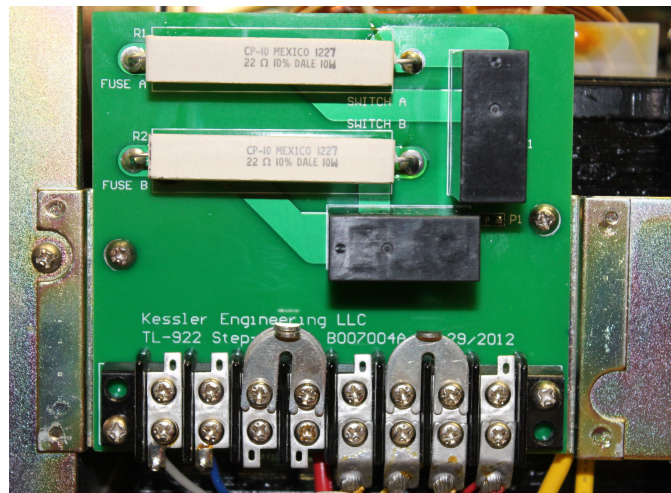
Step-Start PCB and Terminal Strip Orientation
